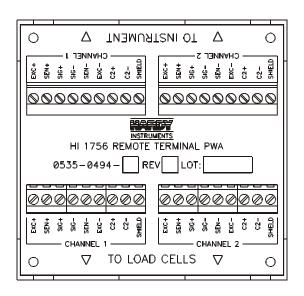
REMOTE TERMINAL ASSEMBLY
